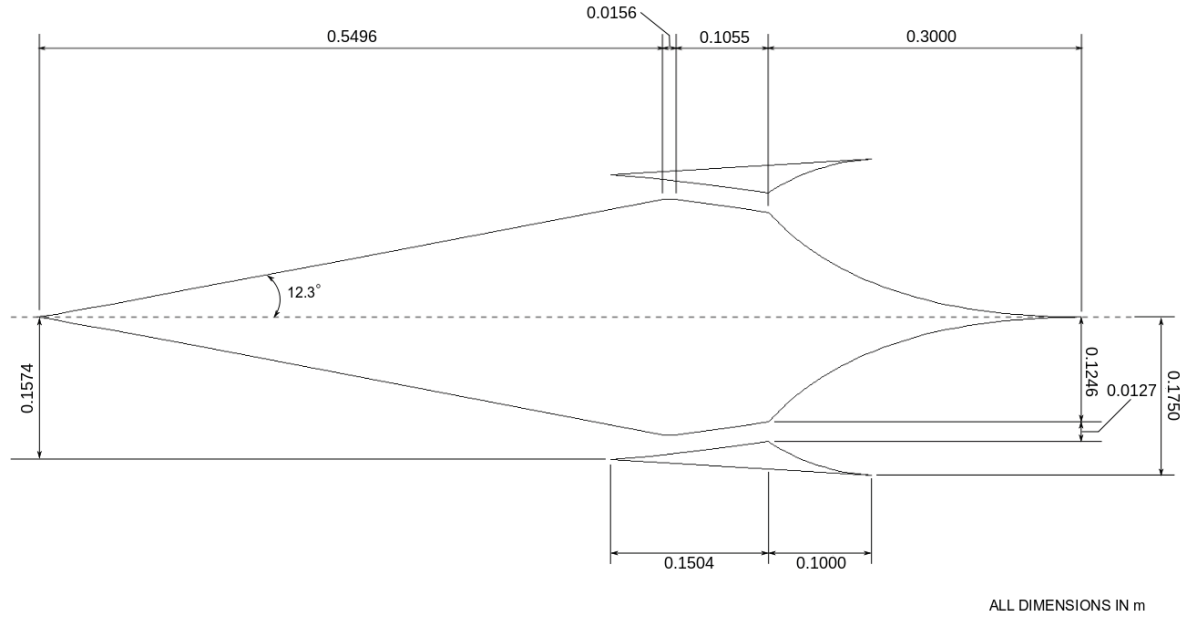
Technical CAD drawing of Stream traced modular axi-symmetric inlet geometry.
